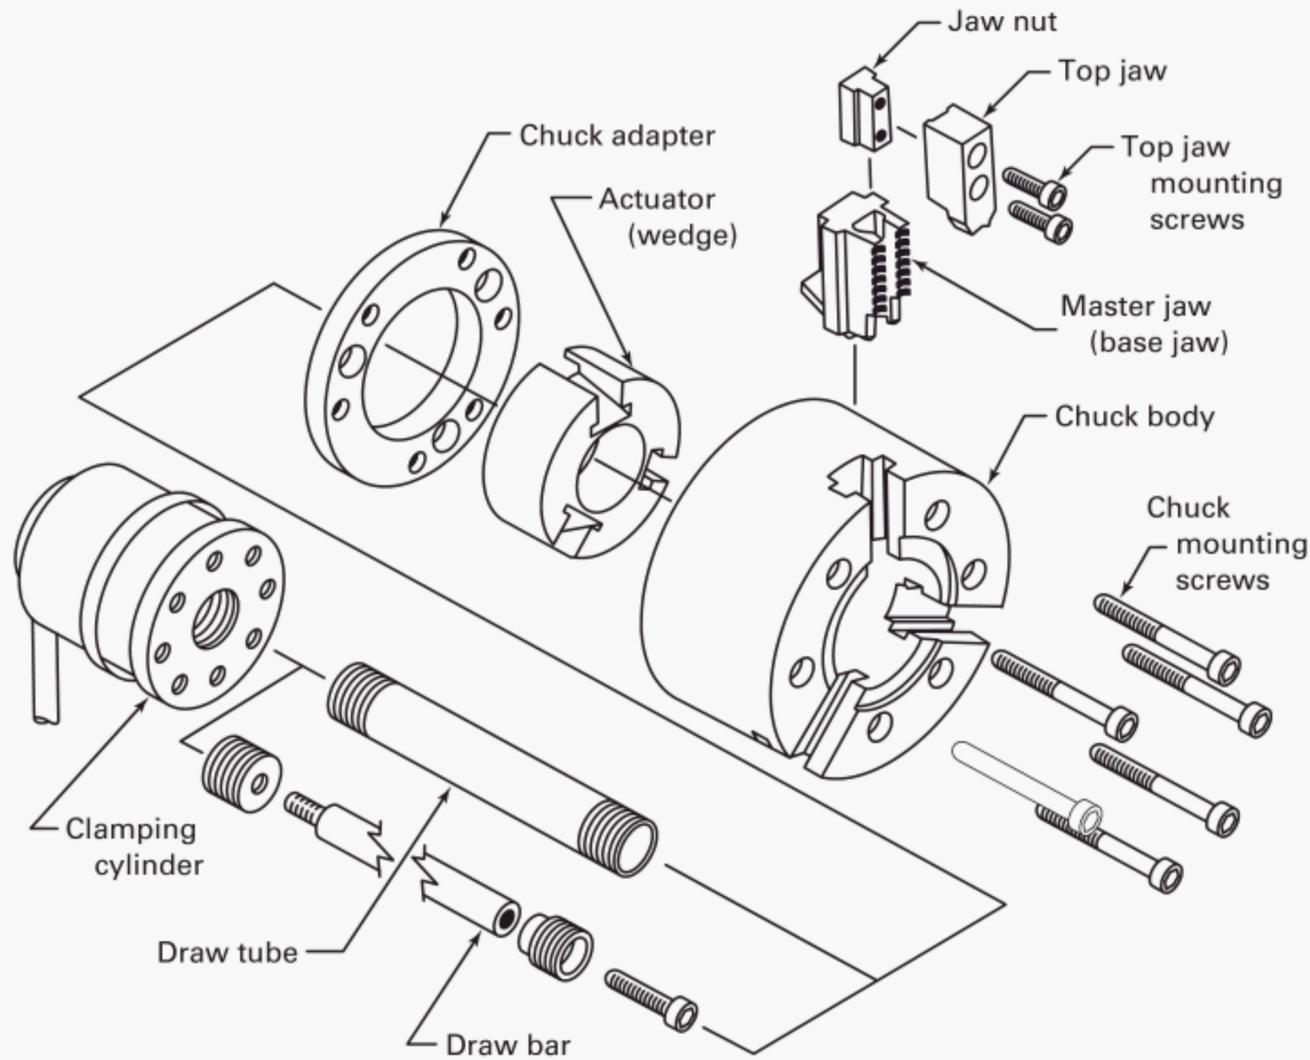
EXPLODED VIEW OF A POWER CHUCK
